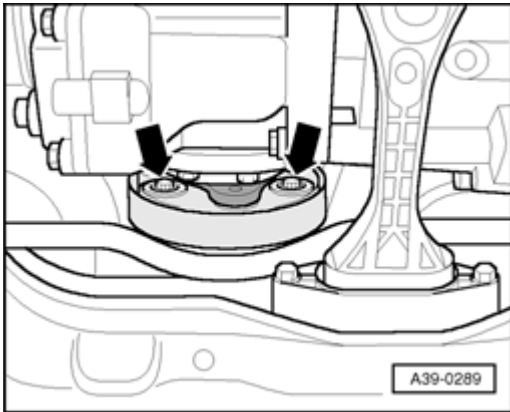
Unbolting Flexible Coupling From Driveshaft
